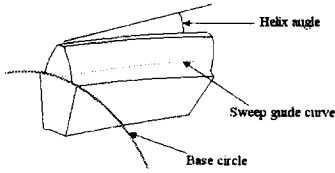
3-dimensional geometry of one tooth for the profiles of gear
